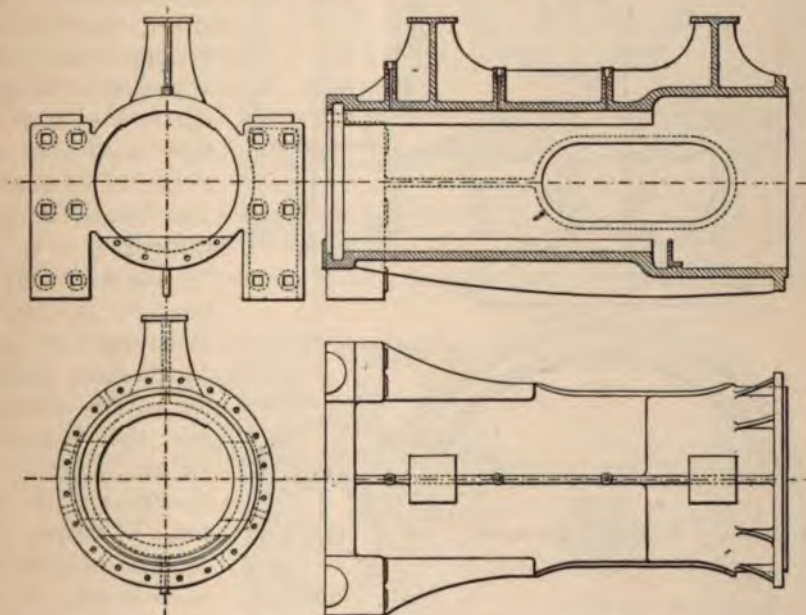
Rail-mill Engines: First Cylinder in Section. Scale $1/32d$.
